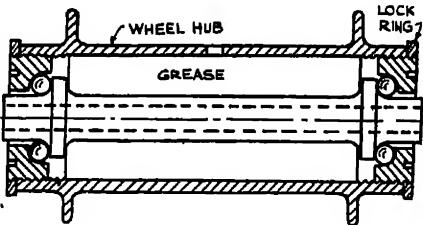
APPLICATION OF CUP-AND-CONE BEARINGS TO
